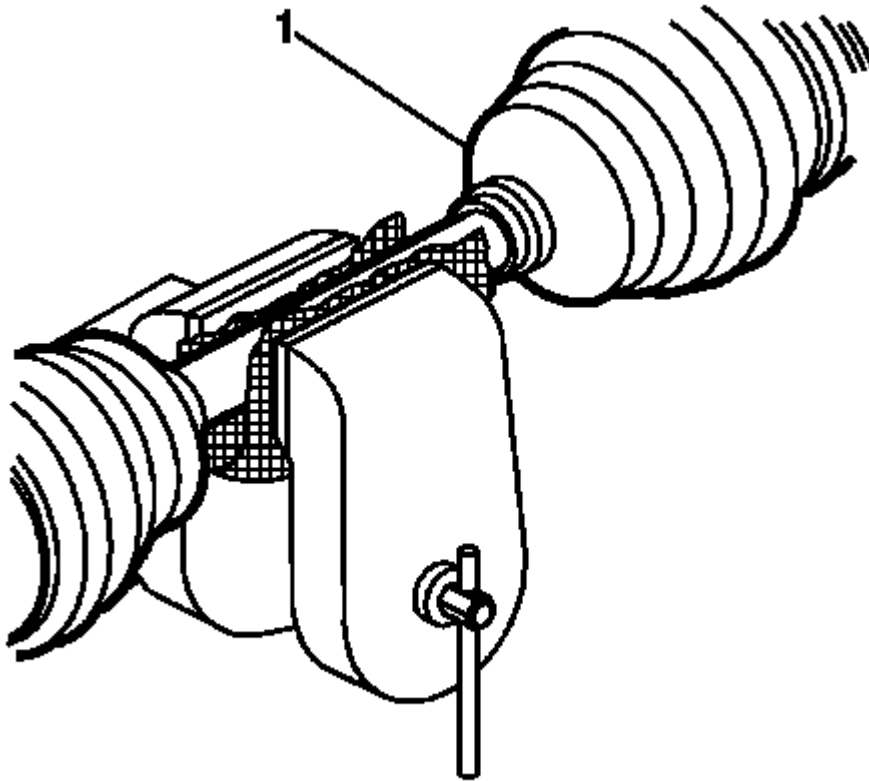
View Of Front Wheel Drive Shaft Inner Joint
